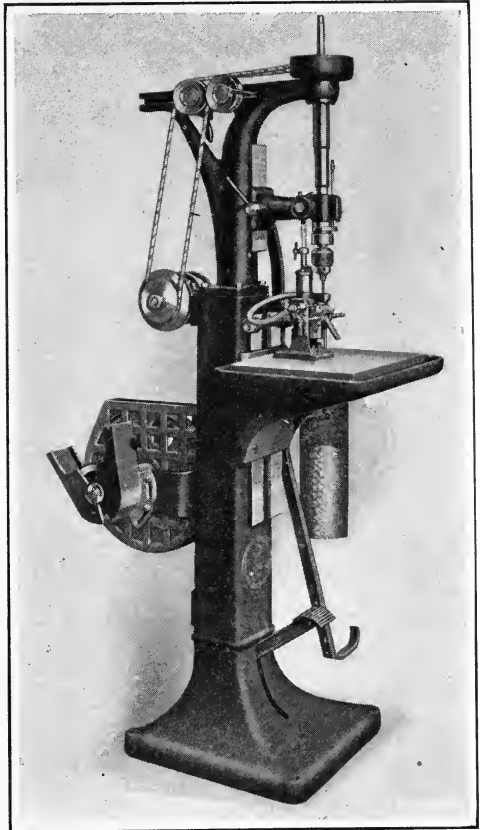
Sensitive Drilling Machine with Special Jig for Drilling Cross-holes in Pins
